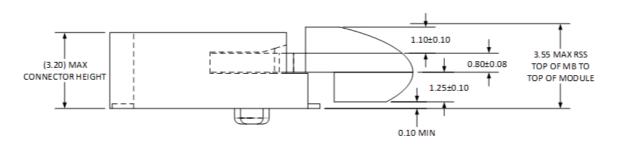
H3.2-D1 - Stack-up Top Mount Double-sided Module for 1.20 Maximum Top-side Component Height
